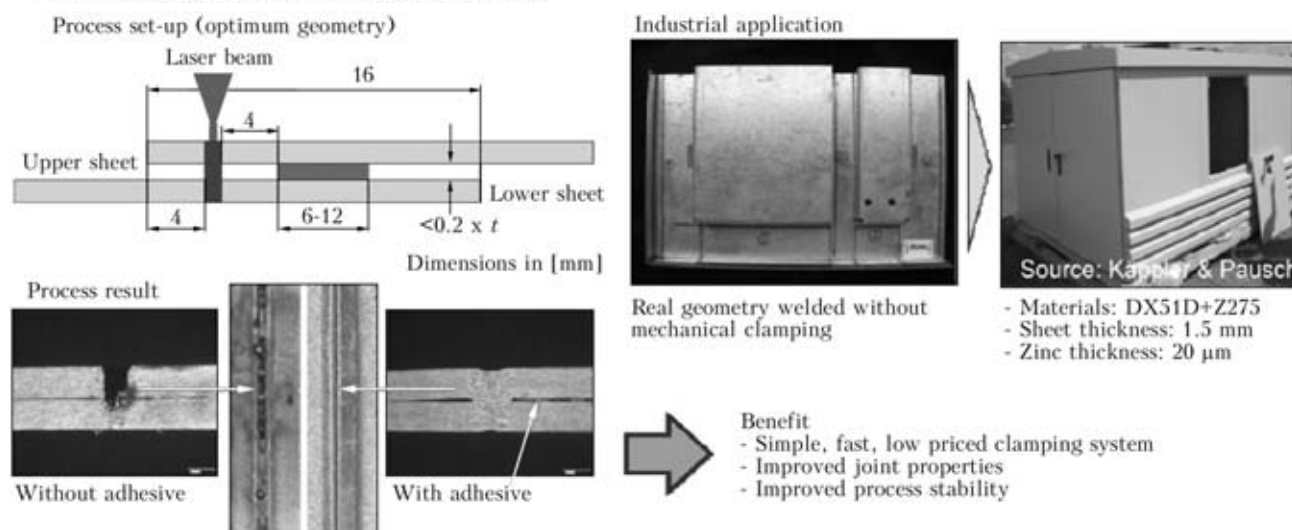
Laser beam welding combined with adhesive bonding
